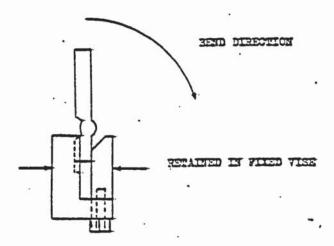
Schematic diagram illustrating the arrangement employed for bend testing small diameter tube welds
